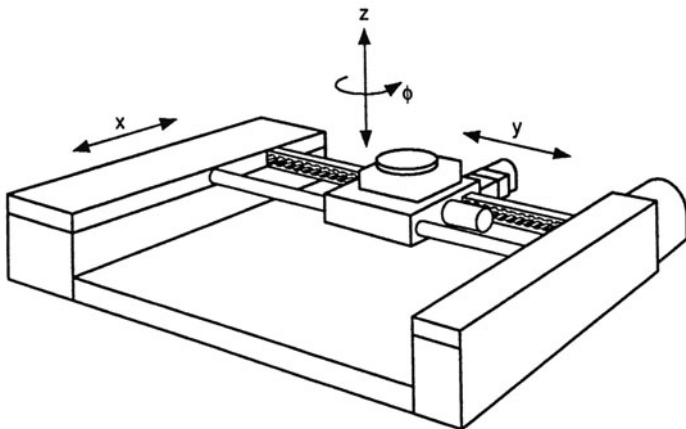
Automatic printed-circuit (PC) board component placement machine requires positioning a placement head at 75 cm (30 inches) per second with a resolution of 0.025 mm (0.001 inch) or better. Control of X, Y, and Z axes, component alignment, and gripper are required from computer programming. A belt-driven gantry is controlled by an indexer, and two servomotor drives are used for X-Y positioning. Z motion and rotational alignment are controlled by a computer microstepping drive. Joystick inputs are used to move the head manually and to teach positions to the computer. (Parker-Hannifin Corporation, Compumotor Division.)
